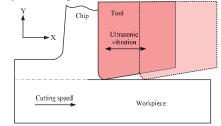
Relative movement of the tool and workpiece in orthogonal UAC.
